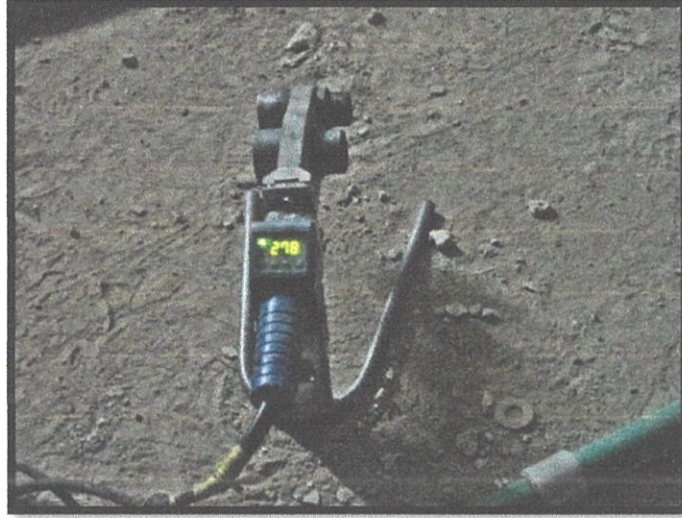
The welding machine is ready to use at the temperature 278 °C
